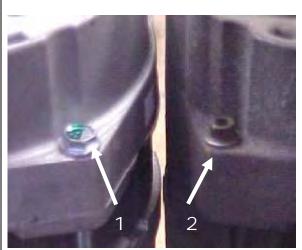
A. Remy only uses hex-head screws (Ref. 1) not socket head screws (Ref. 2) for through bolts.
